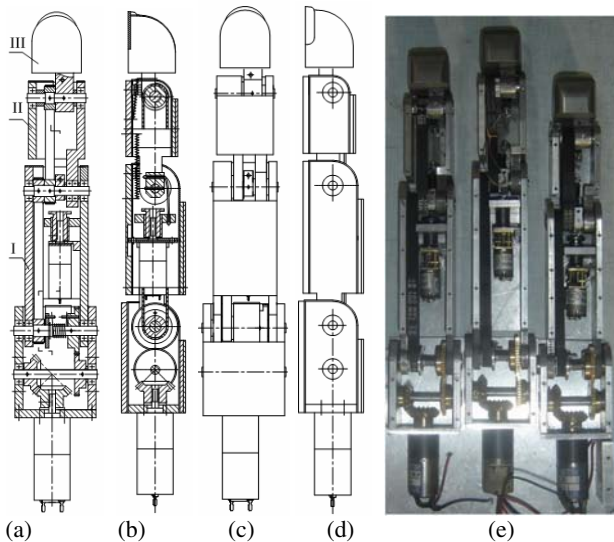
The GCUA finger with 3 joints. (a) front cutaway view; (b) side cutaway view; (c) front view; (d) side view; (e) photo of three 3-joint fingers.
